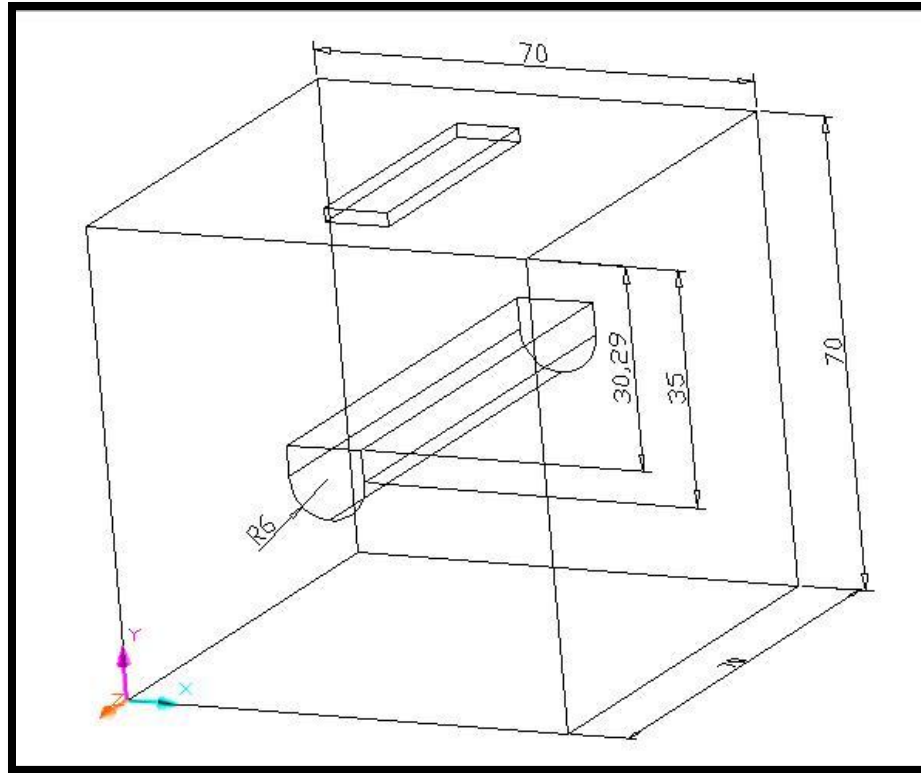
3D view for Dimension of 'D' shape cross-sectional cooling channels
